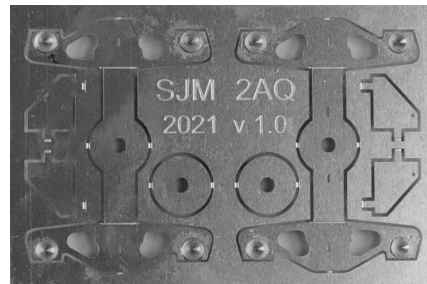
2AQ bogie etch showing the waisted bearings soldered to the inside of the bogie.
